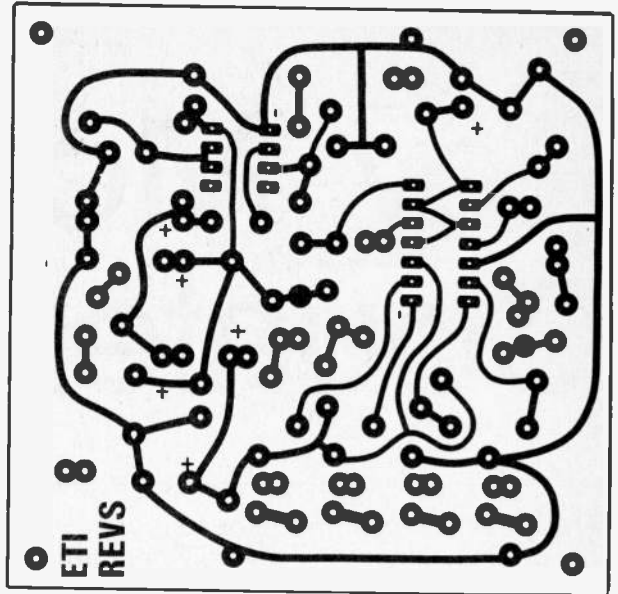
Printed circuit layout. Full size 80 x 75 mm.
